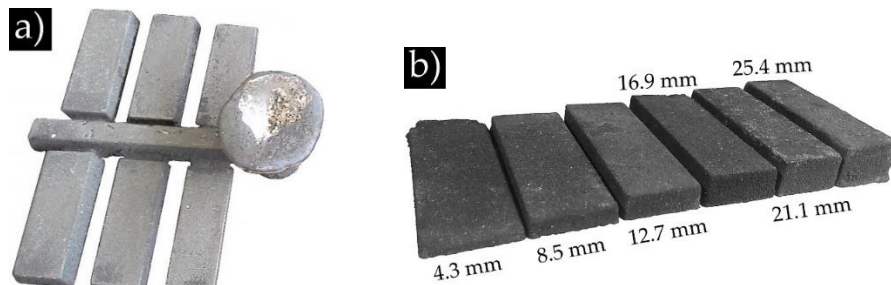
Model of the plates a) after casting and b) plates cut from 4.3 to 25.4 mm
